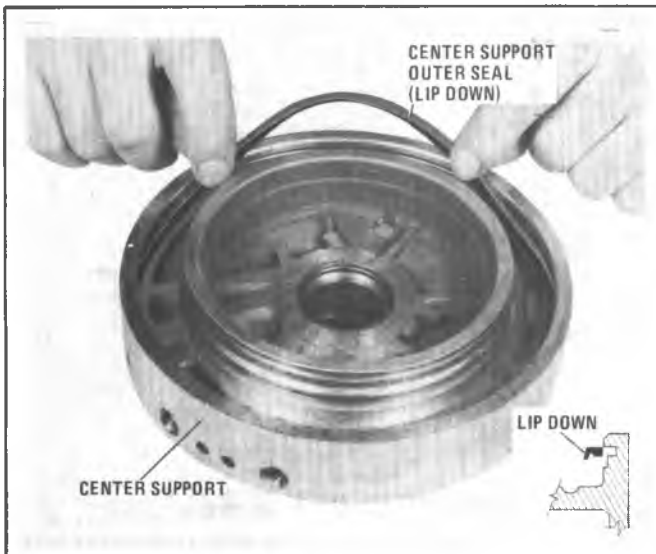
A6-163 Installing Fourth Clutch Outer Seal
